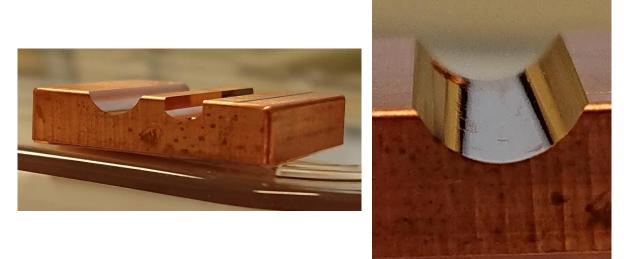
Left: Differences between a pre-machined (right) and finish machined (left) lens. Right: Detail of a finish machined lens.
